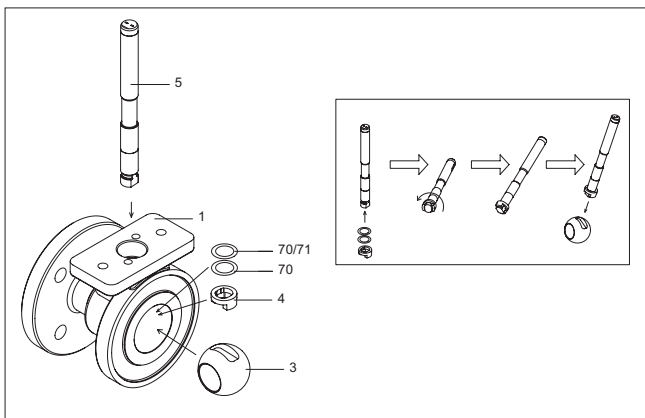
Assembling the shaft in sizes 1" and 1.5"
